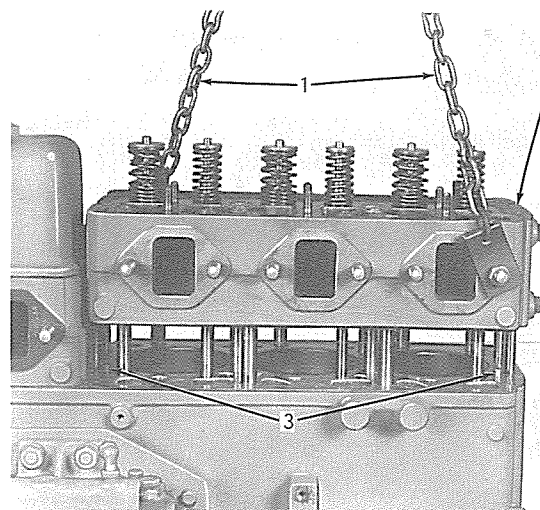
Removing Cylinder Head From Engine (T-27629)
